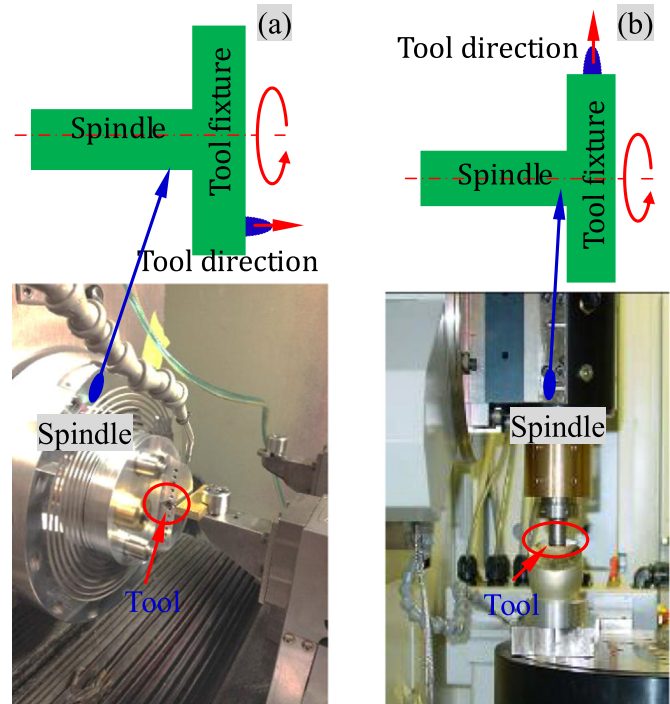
UPFC: (a) End-UPFC with the tool setup along the spindle axis, and (b) Radial-UPFC (UPRM) with the tool setup along the spindle radial direction.
